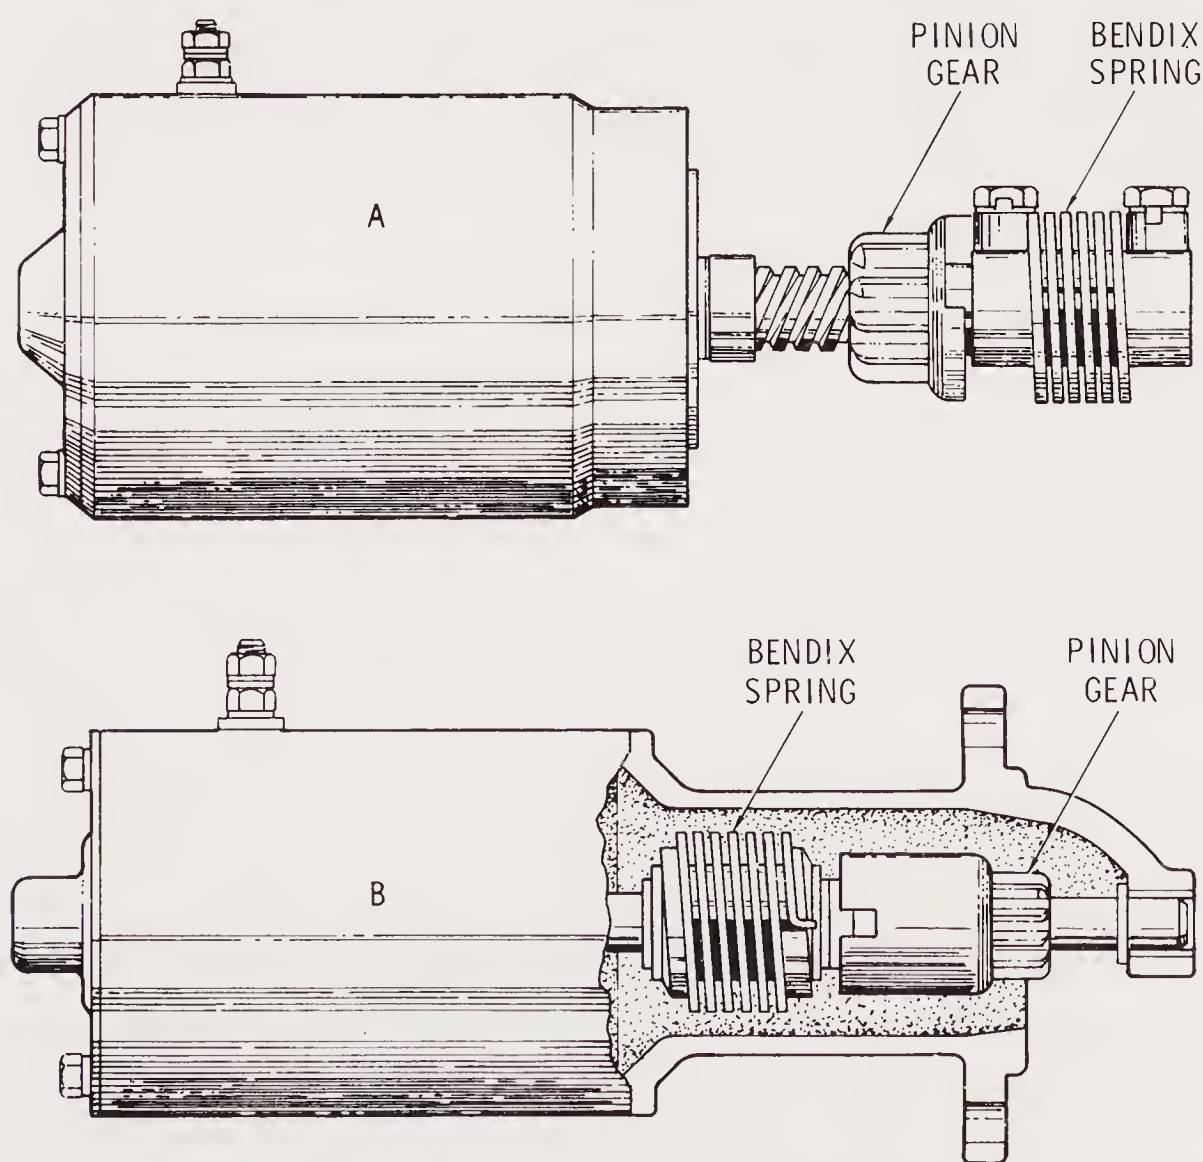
Bendix-drive starter showing gear arrangement. (A) Inboard type. (B) Outboard type.
